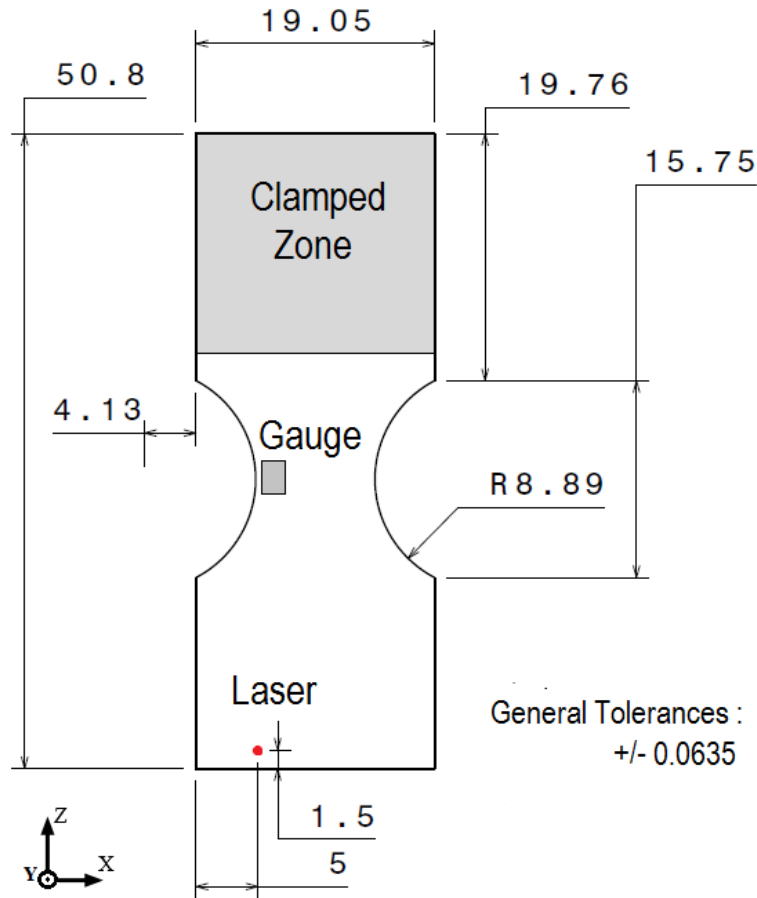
Technical drawing of sample geometry showing position of instrumentation and clamped zone (measurements are in mm)
